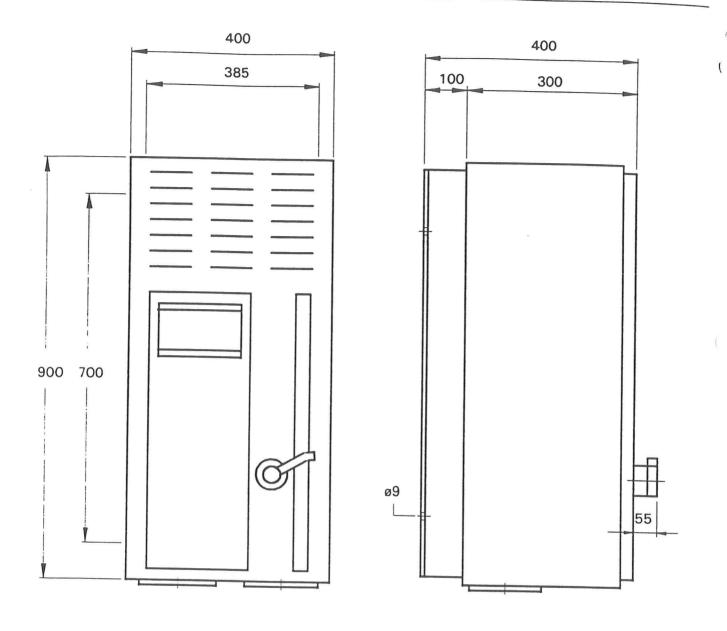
Dimensions of the chassis unit IPO0 type V\*I 305/380/450
